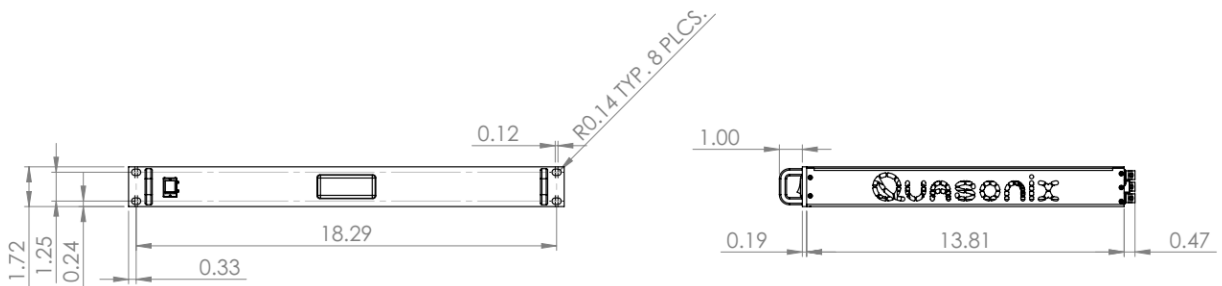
Mechanical Drawing – 1U Front and Side Views - EVTM 1U Rack Mount Encoder/Decoder
